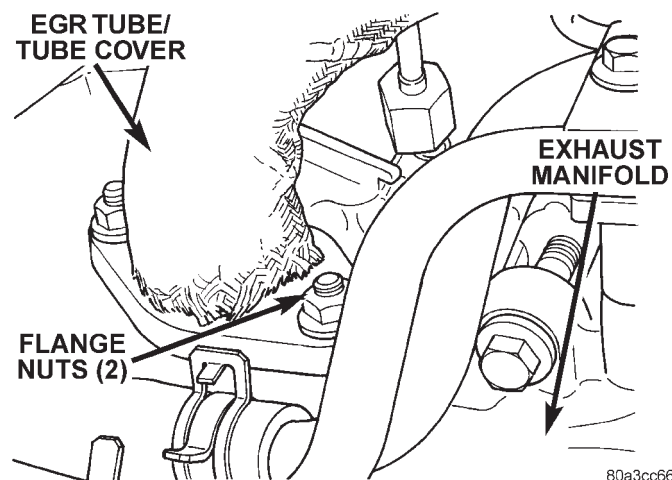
EGR Tube Nuts at Exhaust Manifold
